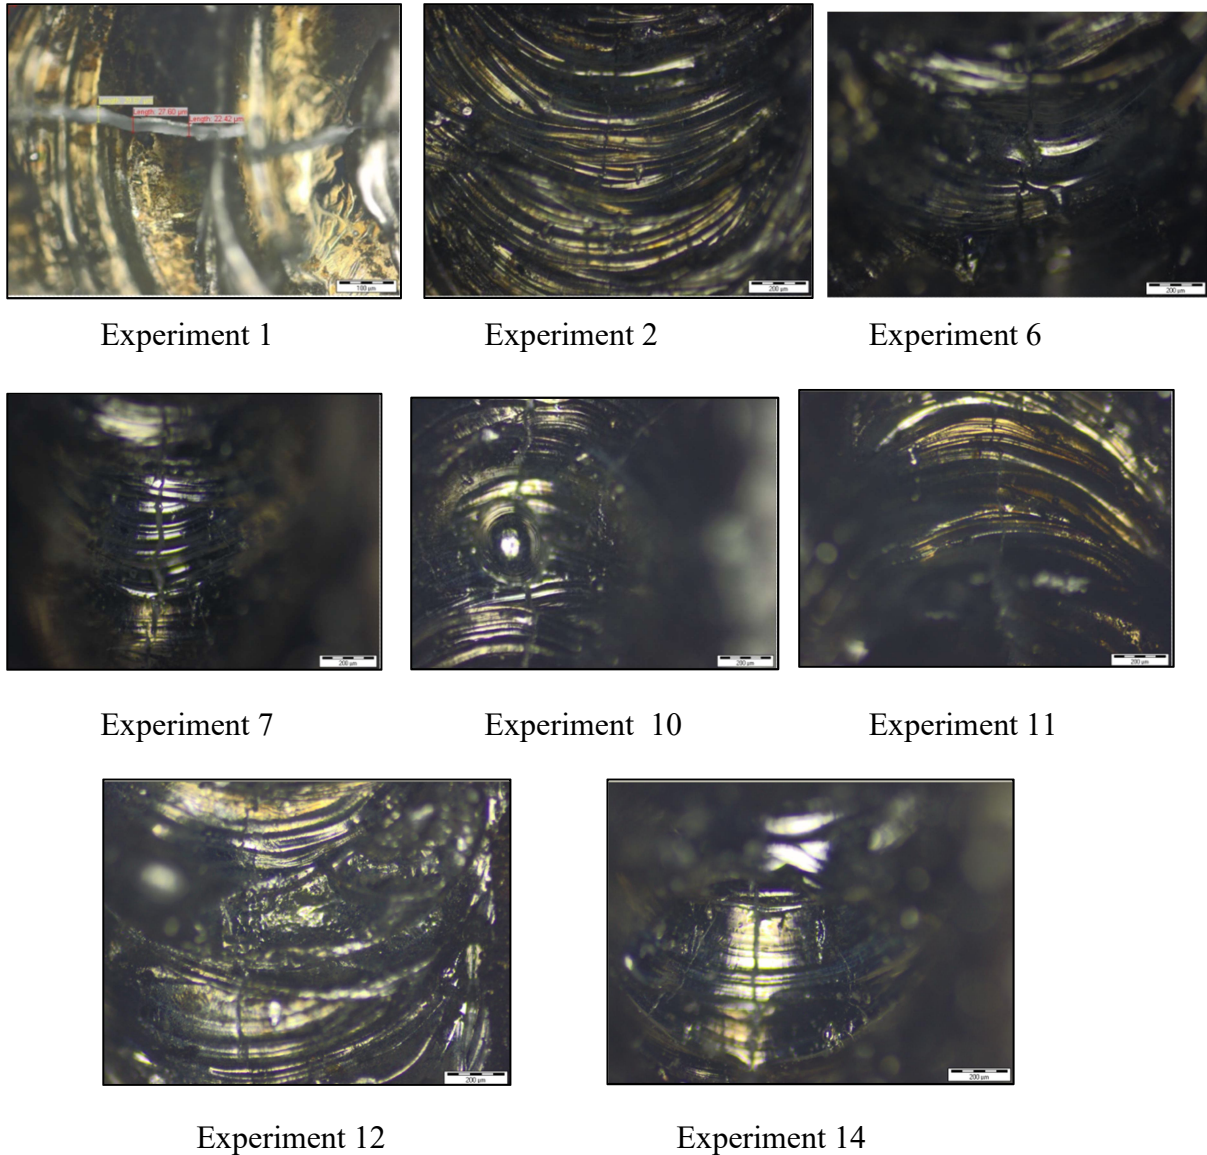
Crack present in welded butt joint specimen
